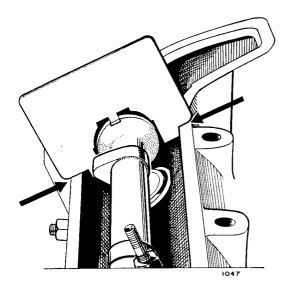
The valve timing gauge in position. Ensure that the gauge is seated at the points indicated by the arrows.
